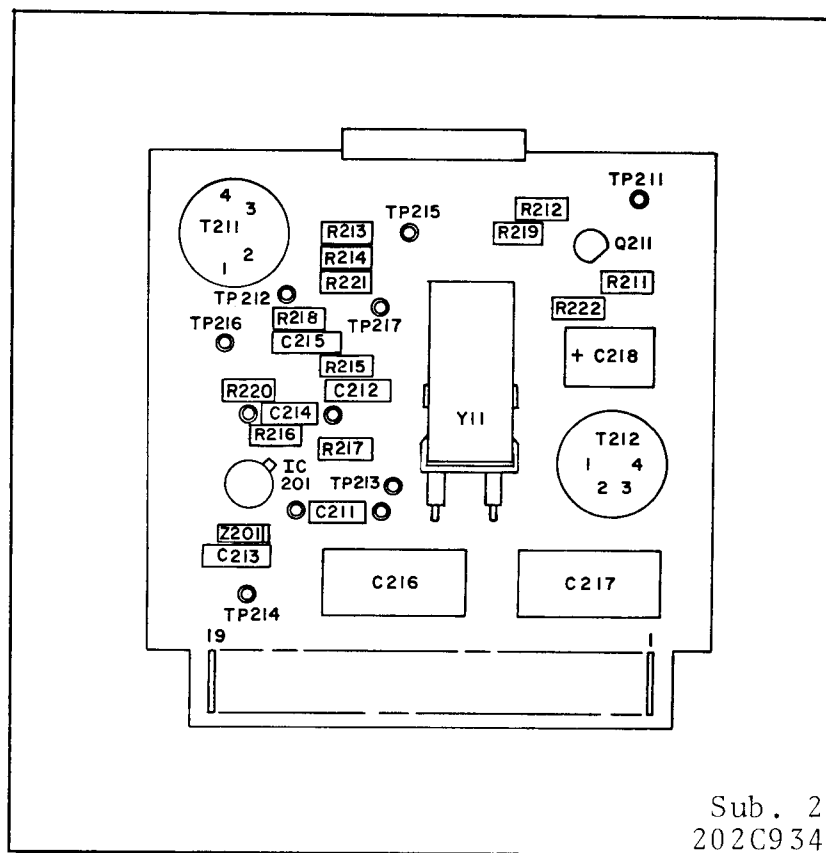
Component Locations on the carrier level indicator printed circuit board.
